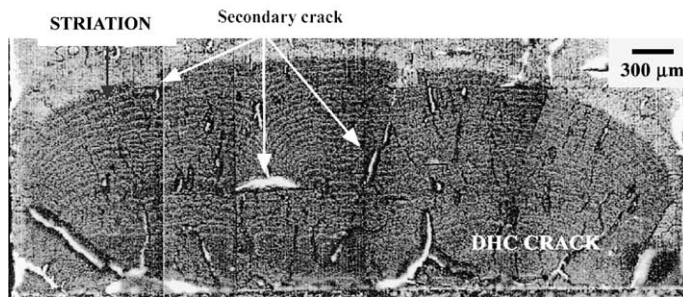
Typical striation pattern and the secondary hydride cracking on the fractured surface of L90 CB specimen after DHC testing, at 250°C.
